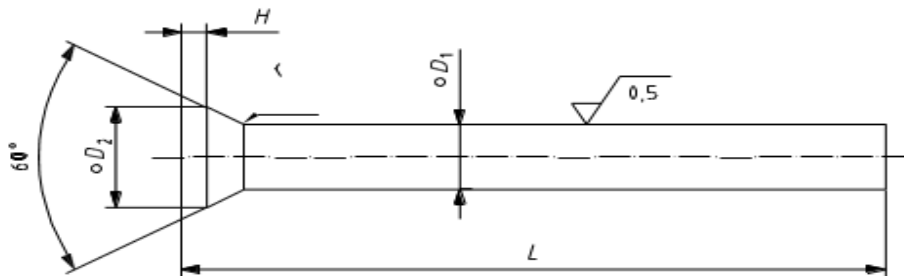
ROUND PUNCHES WITH 60° CONICAL HEAD AND STRAIGHT SHANK
